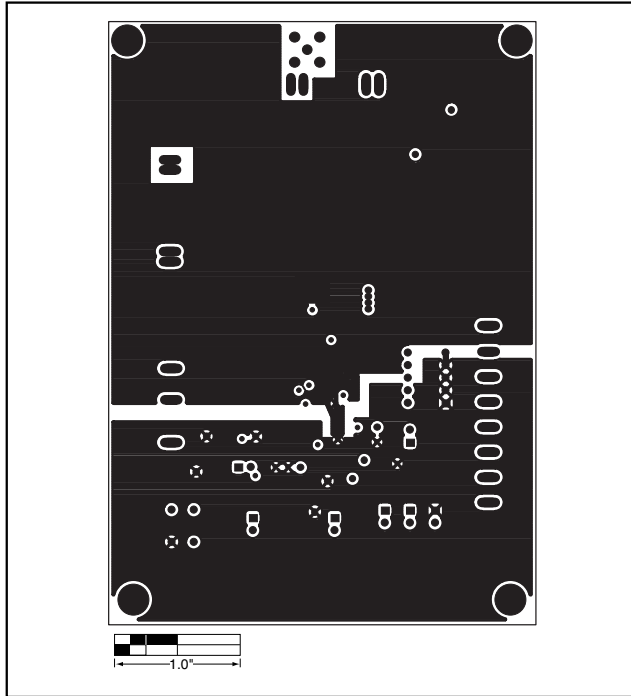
MAX1711 Voltage Positioning EV Kit PC Board Layout—Internal GND Plane (Layer 3)
